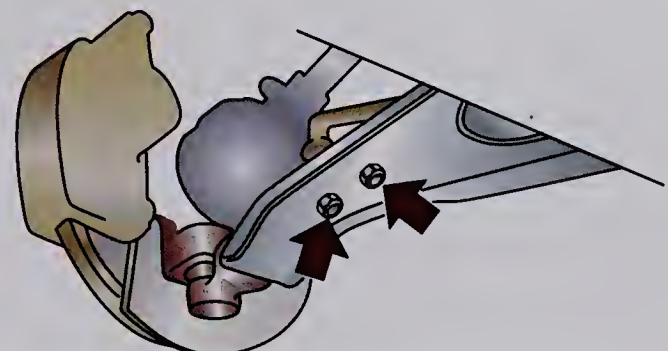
Removing stabilizer brackets from the lower control arm.
